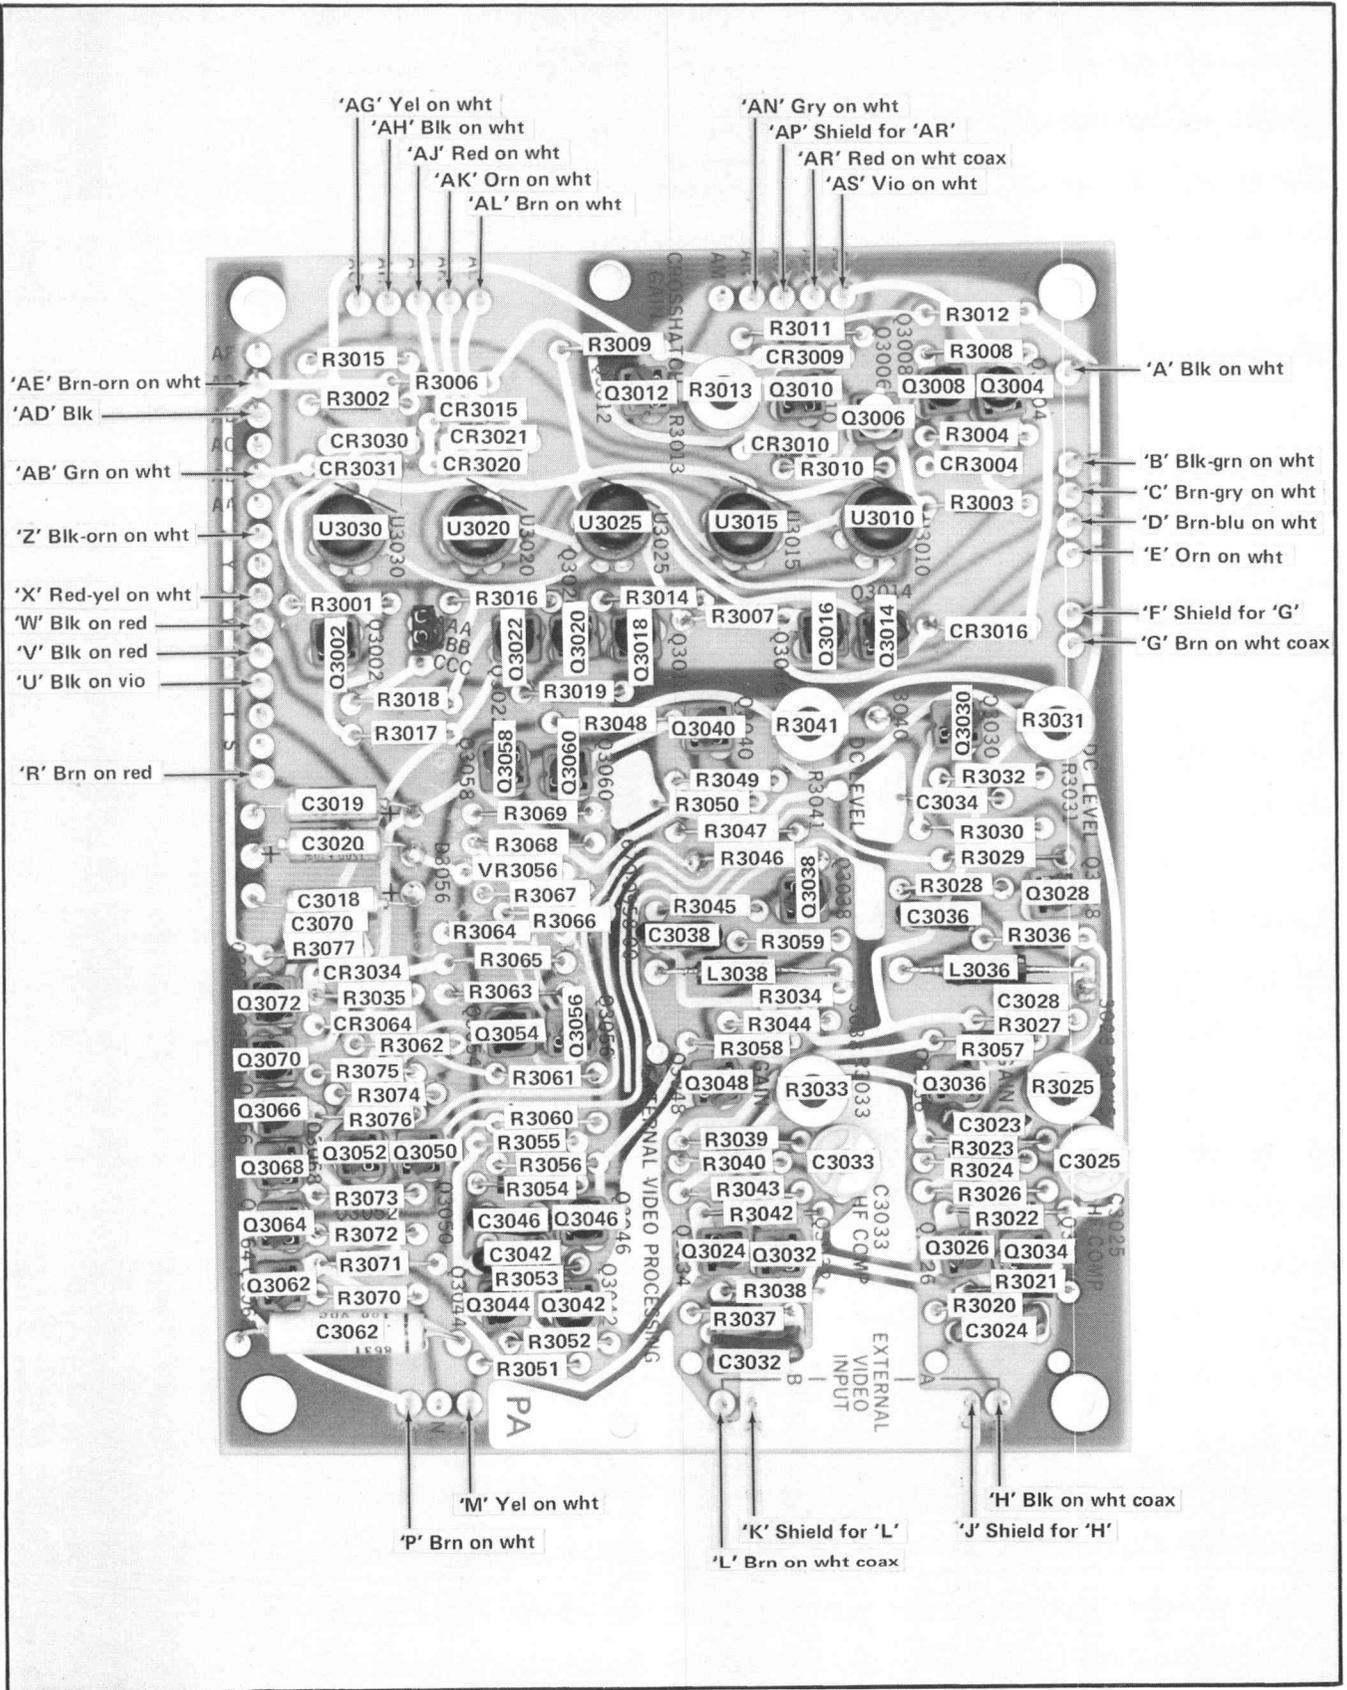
EXTERNAL VIDEO PROCESSING board; component identification and wire color code.
